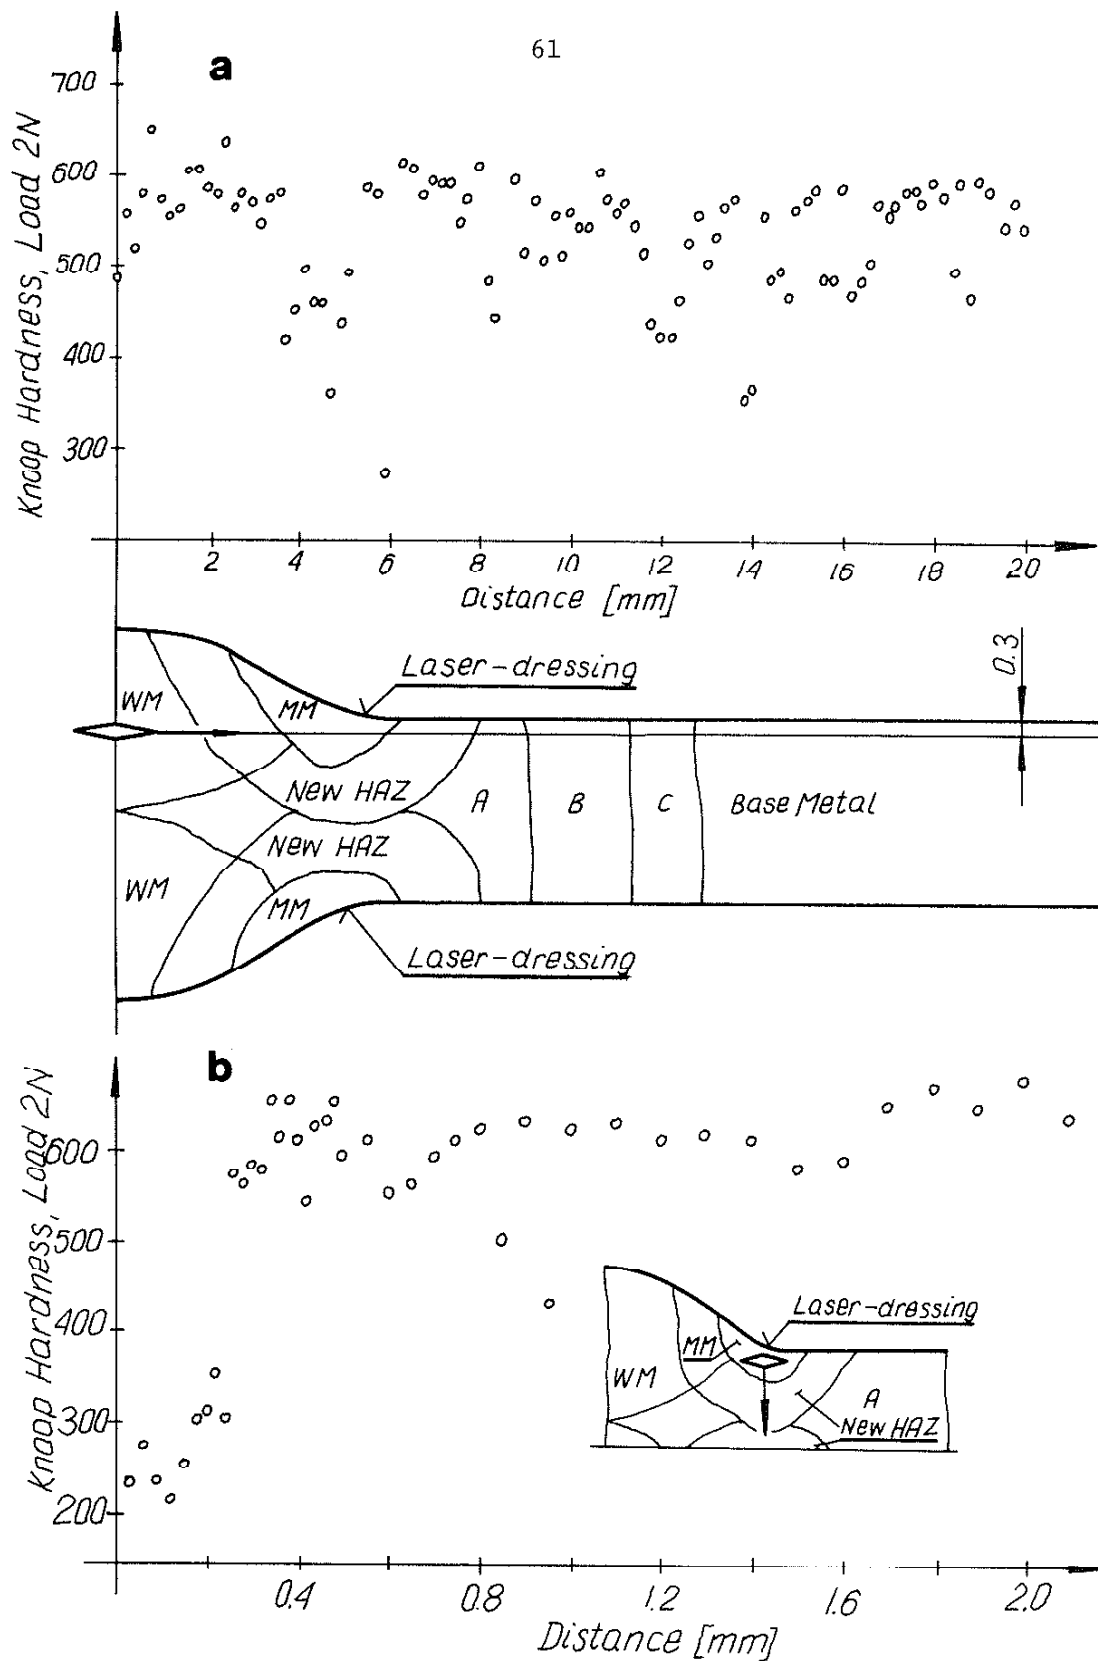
Knoop hardness traverse of welded and laser dressed (LDA) 18 Ni (250) maraging steel. Aging was performed after laser-treatment:: a) At a depth of 0.3 mm below the surface along the weldment, b) inward from the toe.
